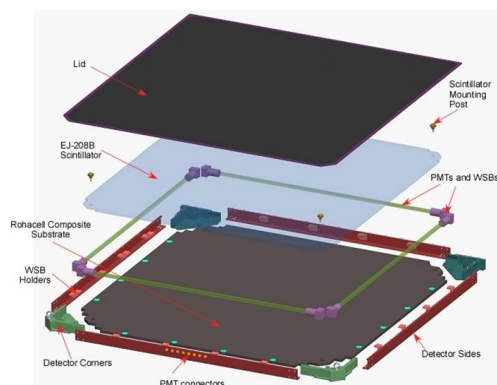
Exploded Figure of Super-TIGER scintillator counter.
